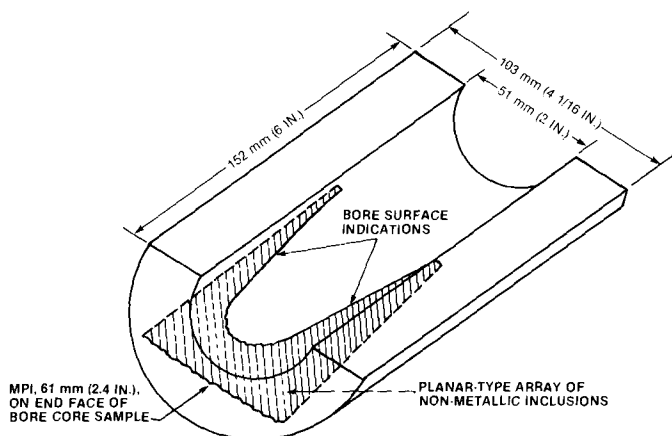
Isometric sketch showing a flaw corresponding to bore surface indications under seventh-stage wheel of HP rotor, BCS No. 2.
